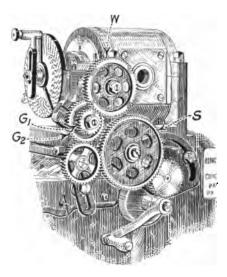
Cincinnati spiral head arranged for spiral milling.
